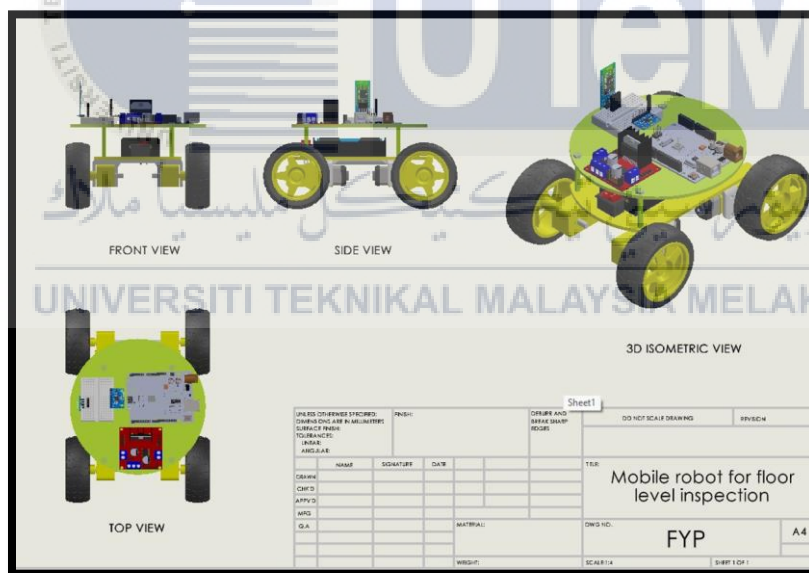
3D model design for the whole mobile robot in CAD Solid Work
